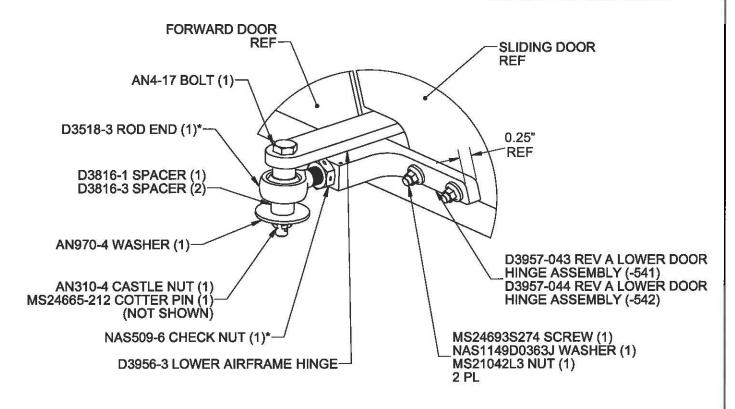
LOWER HINGE ASSEMBLY (-541/-542 CHG 001) (-541 SHOWN, -542 SIMILAR)
